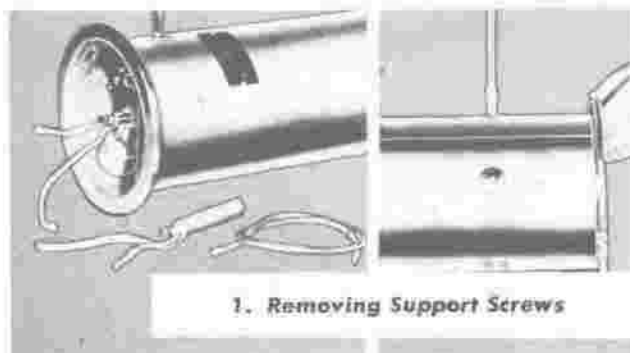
(Sheet 5 of 6)—Heater Assembly
